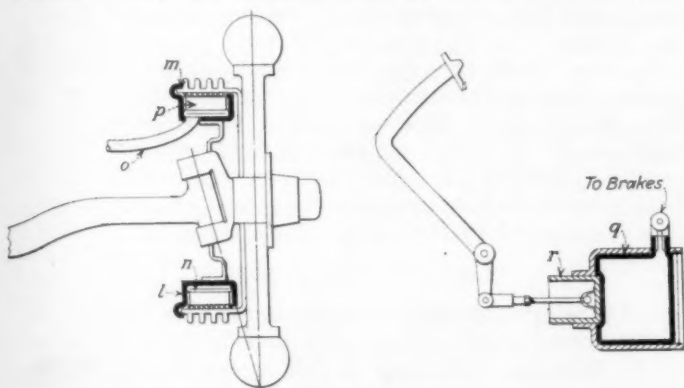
ANOTHER TYPE OF HYDRAULIC BRAKE
